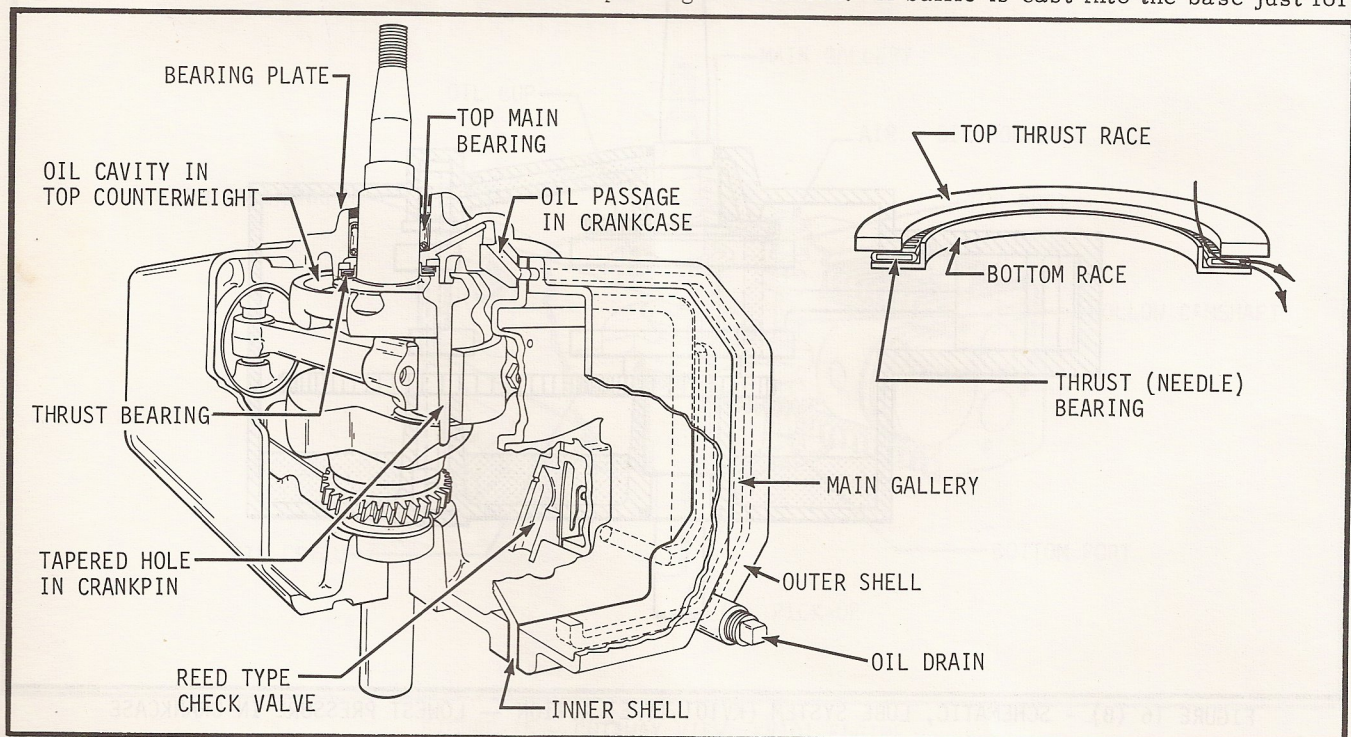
CUTAWAY VIEW, KV141 TYPE ENGINE
